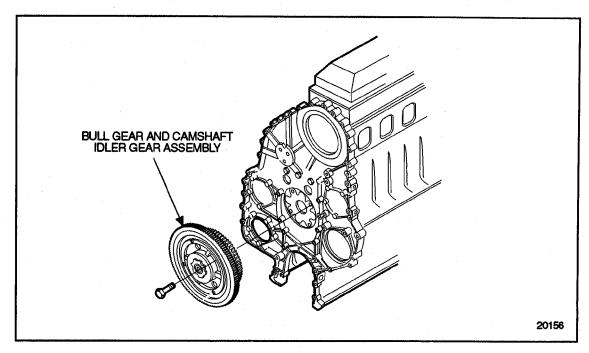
Bull Gear and Camshaft Idler Gear Assembly
